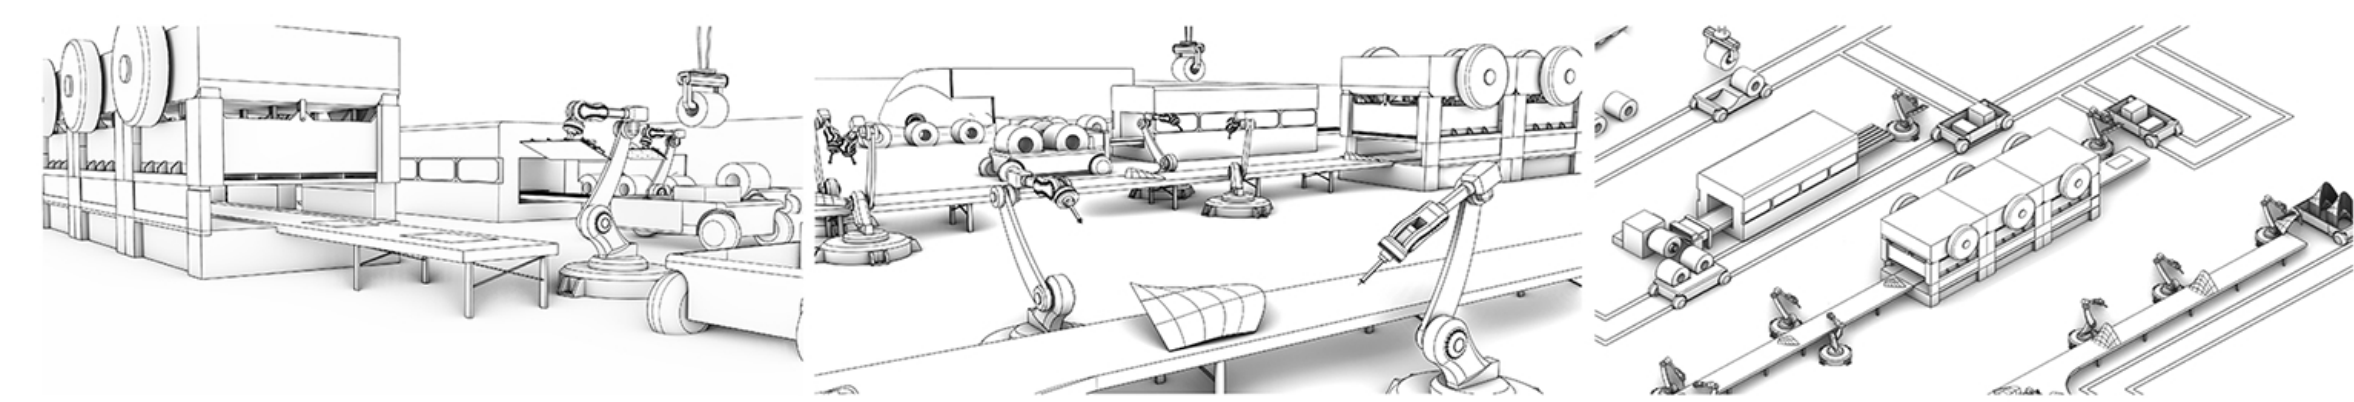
Emerging Manufacturing For Modular Rib Shell Modules: Robotic Stamp Pressing
